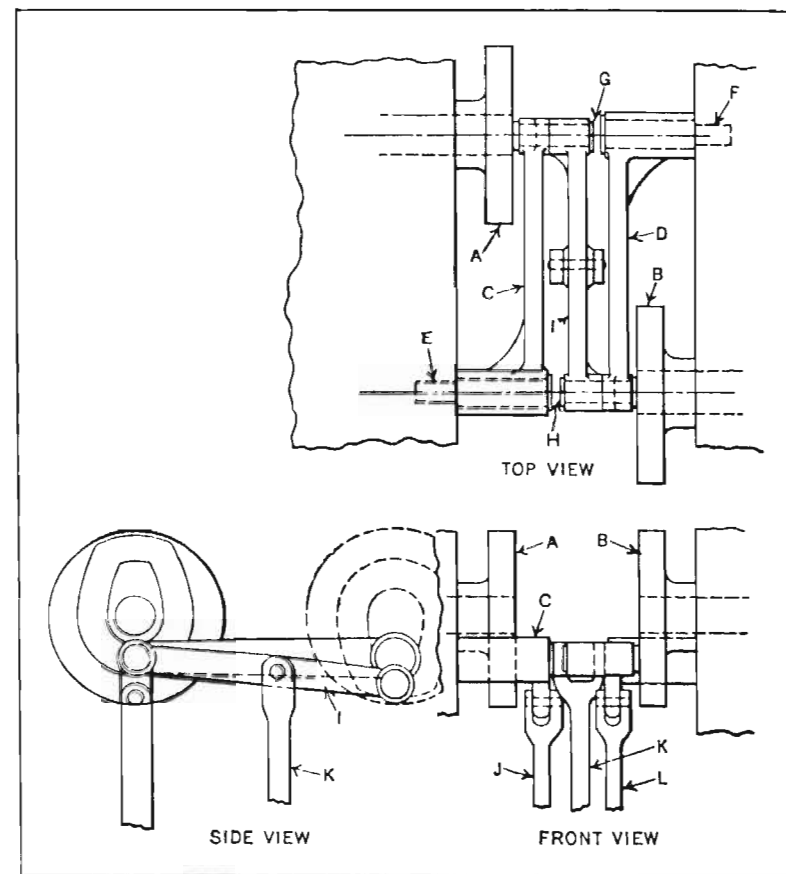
Mechanism for Transmitting Motion to Three Levers of a Wire-bending Machine
